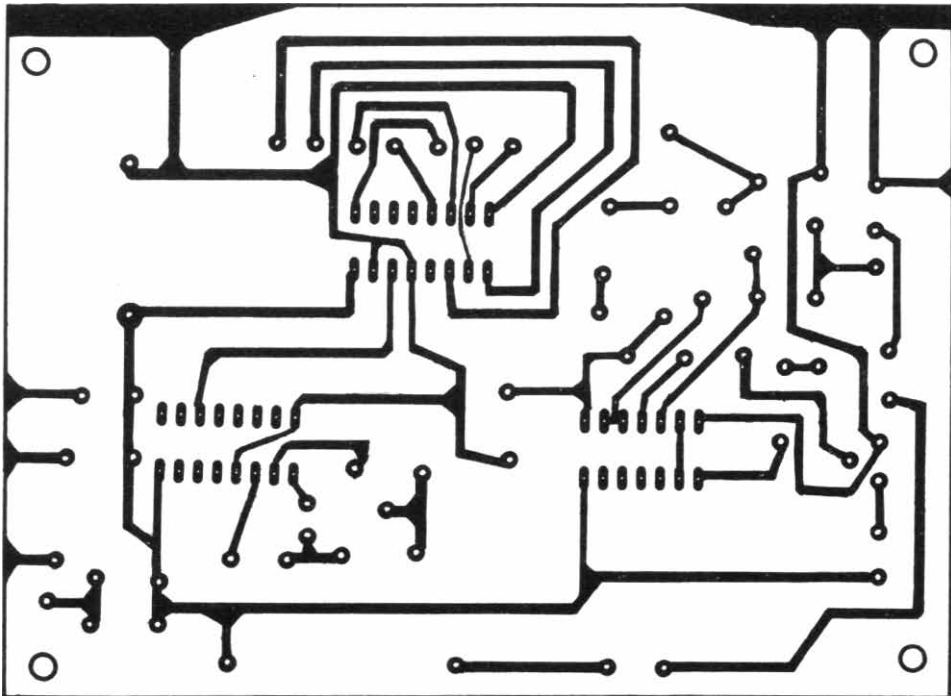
Actual-size PCB layout of the circuit shown in Fig. 1.
